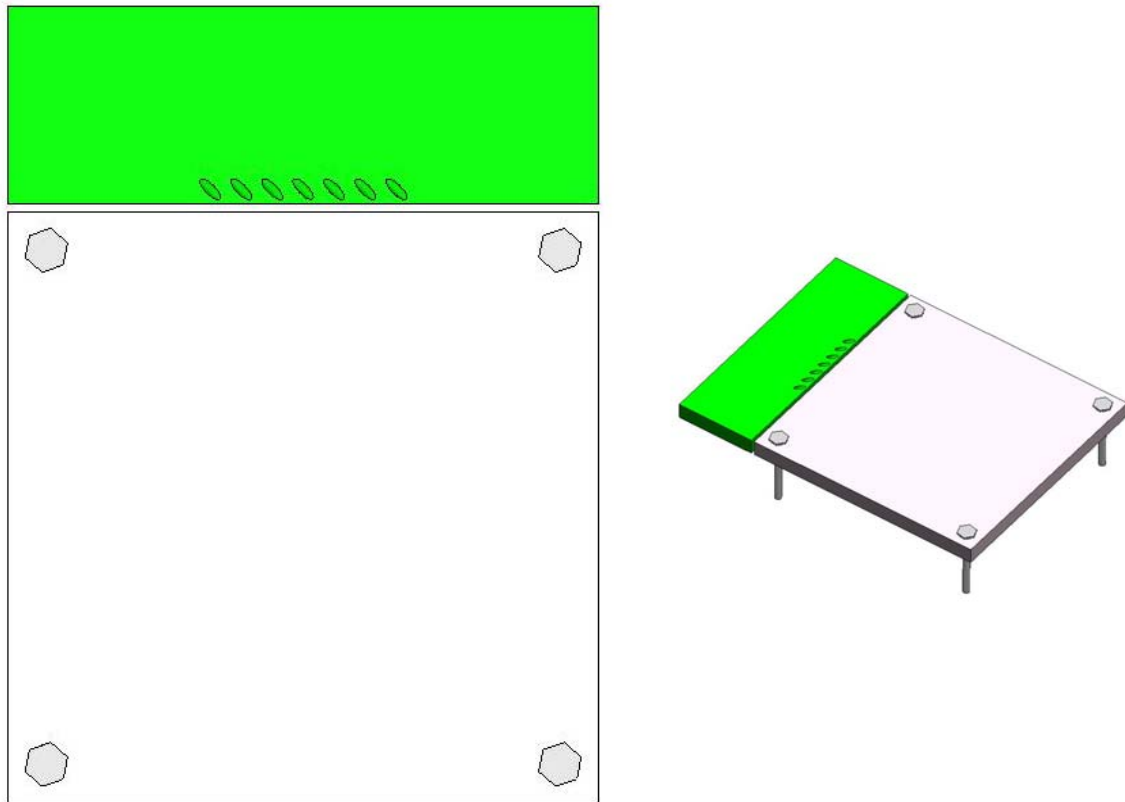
Smooth test surface piece used for the liquid crystal and PSP techniques
